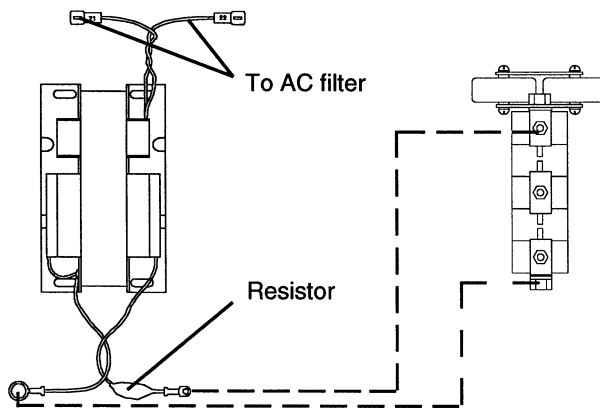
Twisting Wires on 6kV Transformer and Attaching to Spark Gap Assembly
